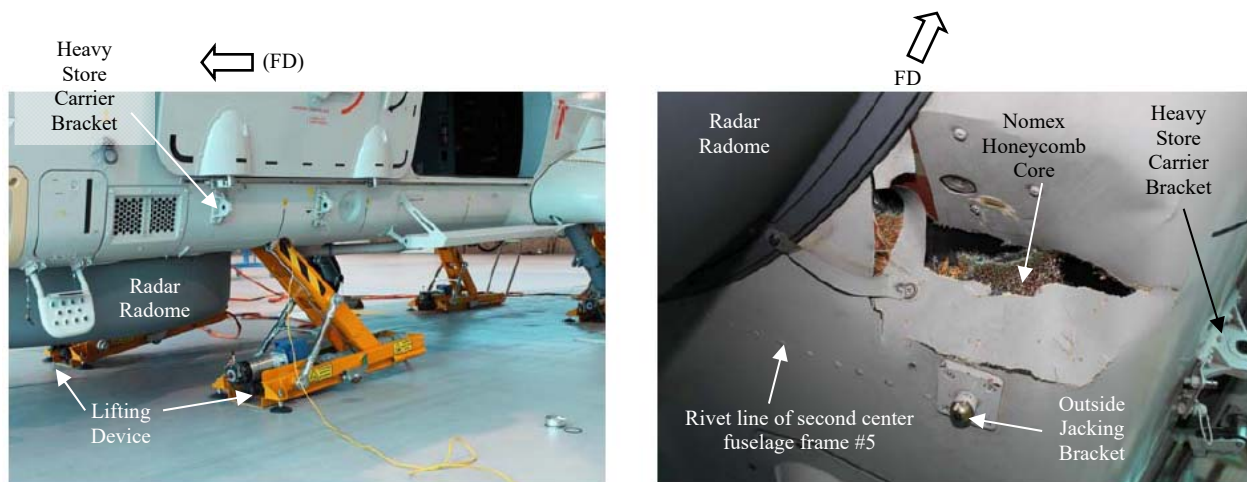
Damaged Bottom Shell Sandwich Composite Structure
